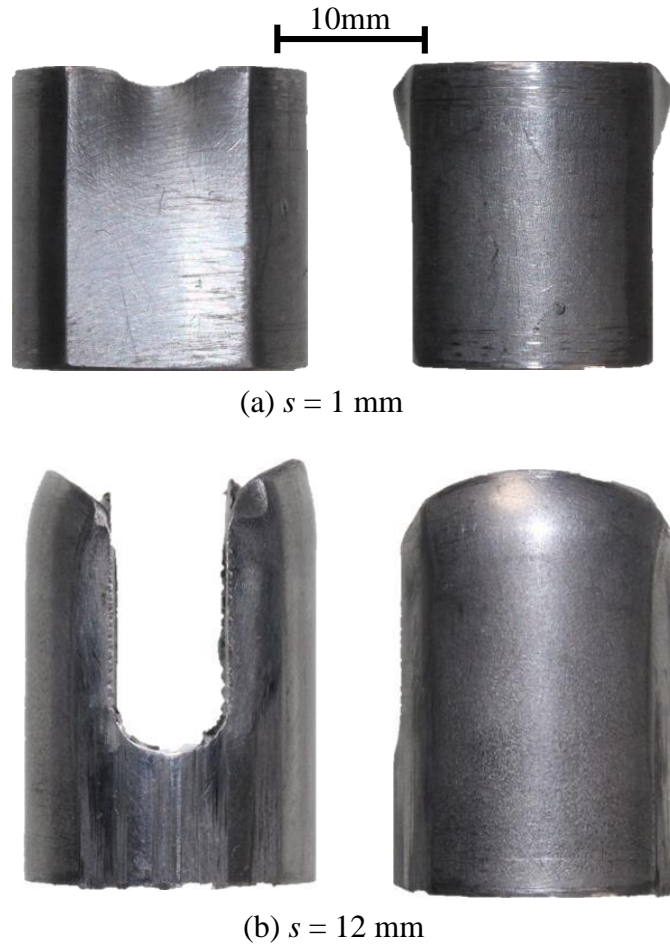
Two flat sides billet after test by using cylindrical punch
